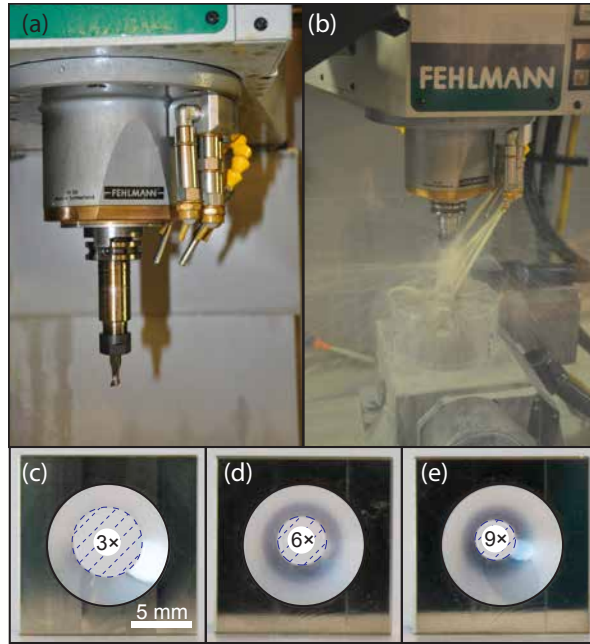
(a) Close-up of the milling head located inside the milling cutter machine. (b) Milling process of the external light trap. The aluminum rod that will become the concentrator is fixed in the setup. Various bits are used for the different fabrication stages of the concentrator. A beam of cooling liquid is used to carry away heat generated during the milling and to remove the released metal chips during the milling. (c–e) Top view of the concentrators with different concentration factor ($C=3-9\times$).
